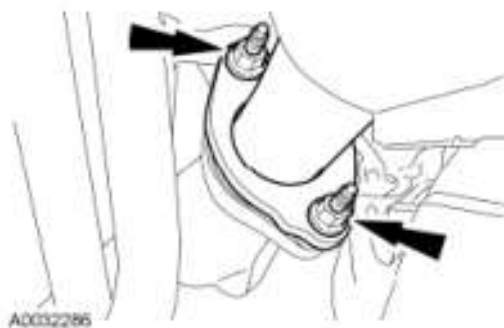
Locating Exhaust Manifold-To-Front Pipe Nuts
